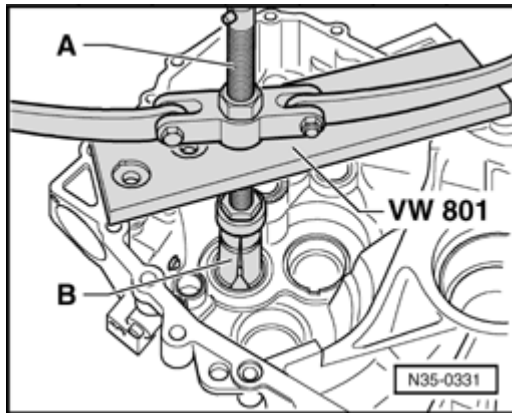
Pressing tapered roller bearing outer race out of transmission housing
